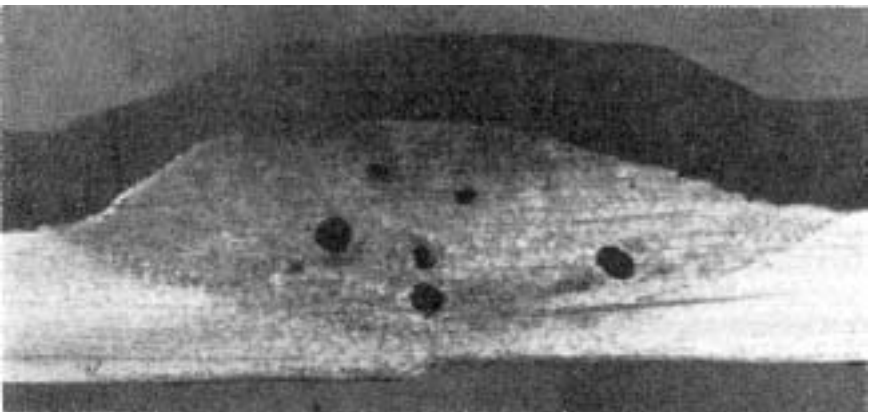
Cross section through weld showing severe porosity. This weld had been in low-pressure service for 40 years without failure. (Magnification: 2X.) (Reprinted with permission from Helmut Thielsch, *Defects and Failures in Pressure Vessels and Piping*, New York, Van Nostrand Reinhold, 1965.)
